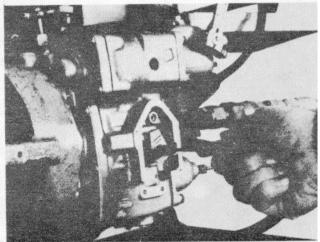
G-94. Adjusting Throttle Shaft Fuel Adjusting Screw
